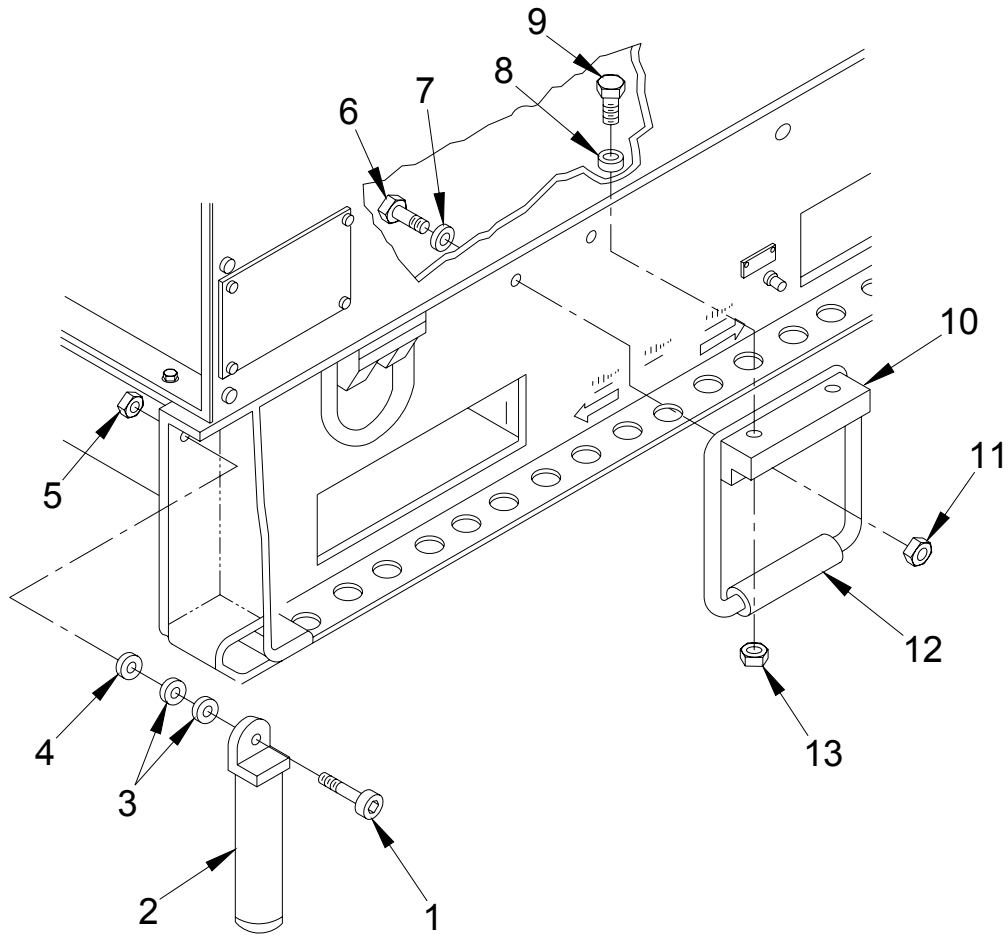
FRAME AND HOUSING ASSEMBLY/FRAME AND LIFTING HANDLES, LIFTING RINGS
